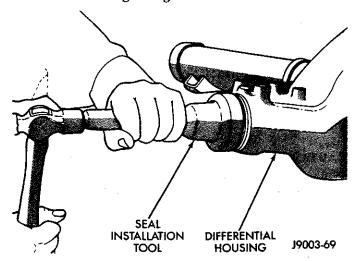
Drive Pinion Gear Shaft Seal Installation
